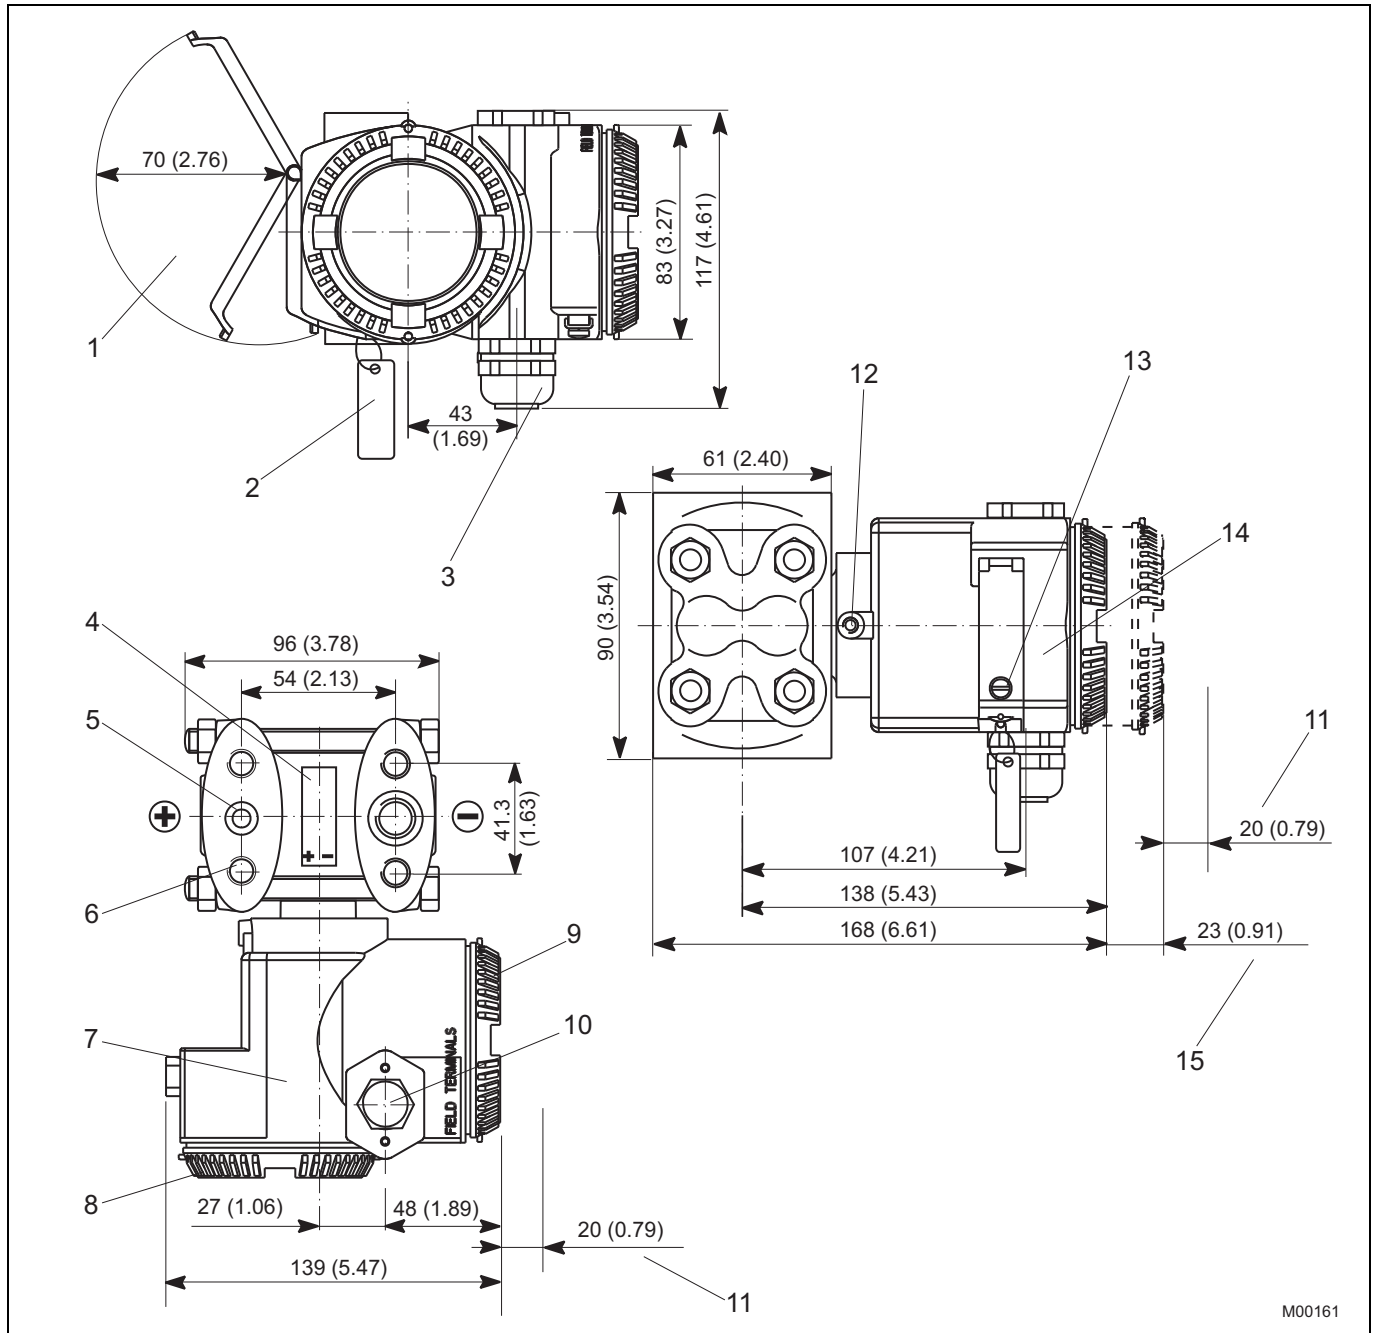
Dimensions in mm (inches), deviations in the drawing are possible
